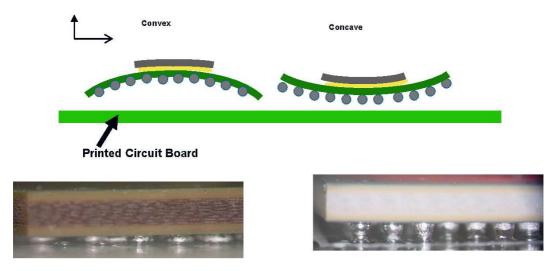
Package before the assembly to the board (Top). Package after the assembly: a) Bridging of solder balls causing short circuit connection (bottom left) and b) Bond between the package and the board not formed properly resulting in an open electrical connection (bottom right)
